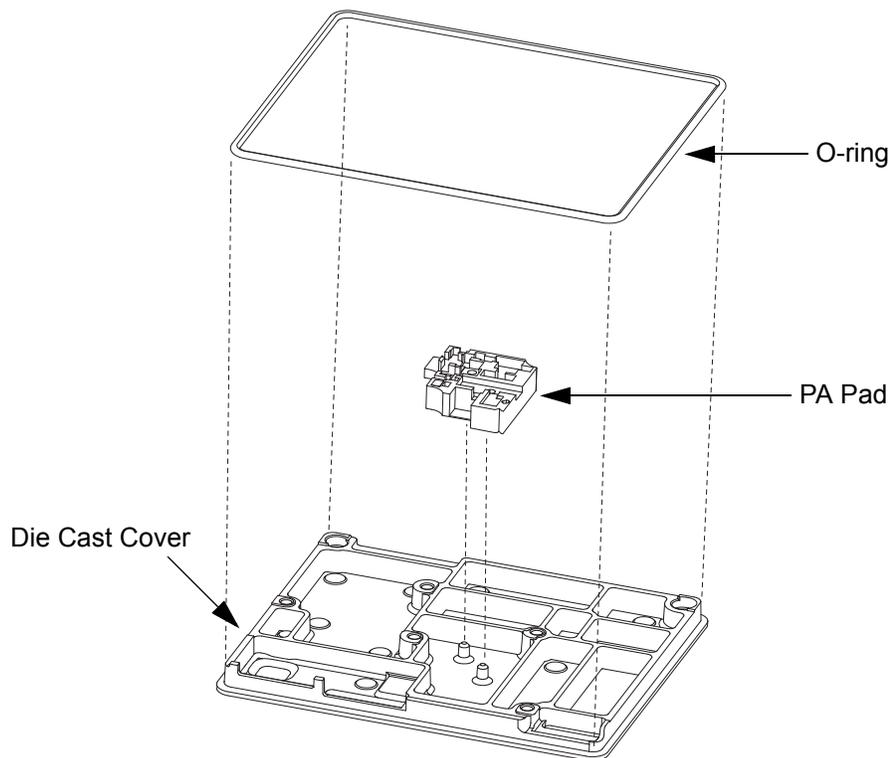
Assembling of PA Pad and O-ring (VHF 8 MB Brick)
